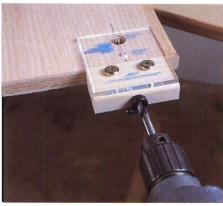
A Minifix jig is a handy tool for laying out the casing holes and drilling perfectly positioned connecting rod holes.
